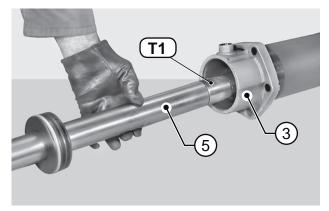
Apply tool T1 (See drawing T1 p. 45) to the piston rod on non-head side (2) and center rod into cylinder (3) so as to fit it into piston (5).
